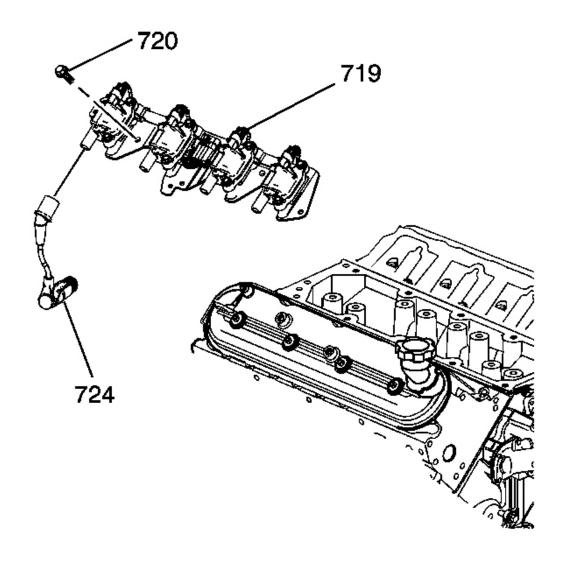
Ignition Coils & Bracket Courtesy of GENERAL MOTORS CORP.
